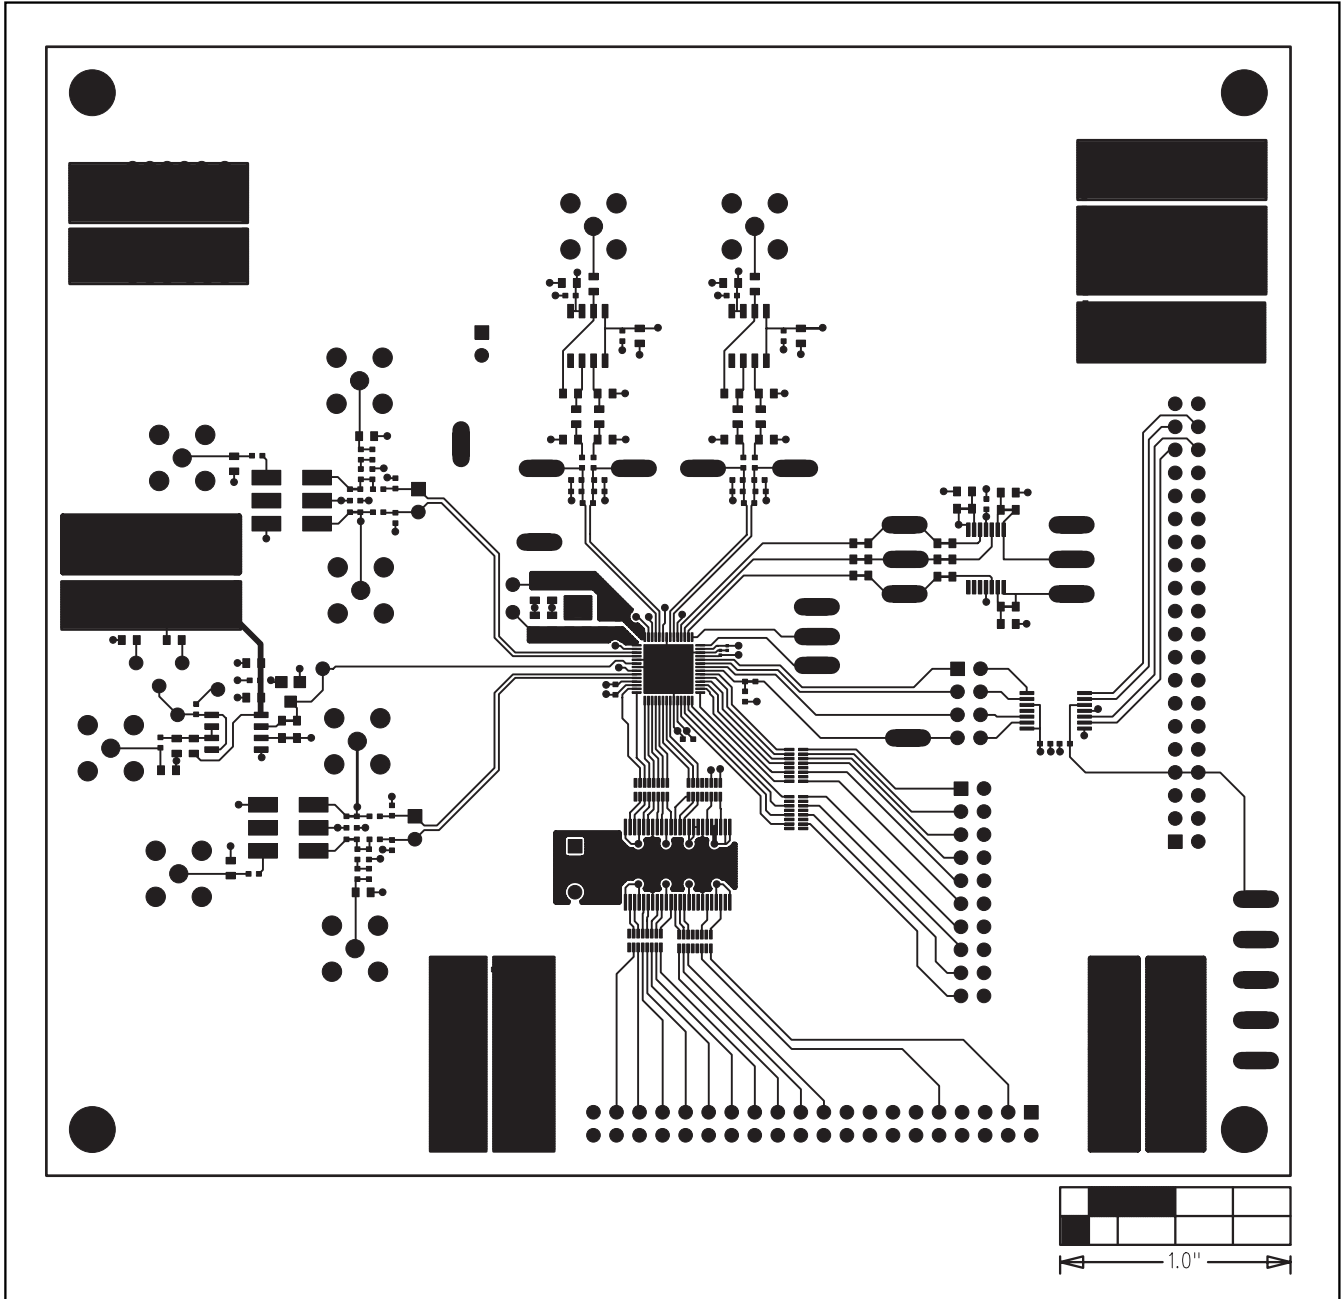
MAX19710-MAX19713 EV Kit PCB Layout—Component Side
